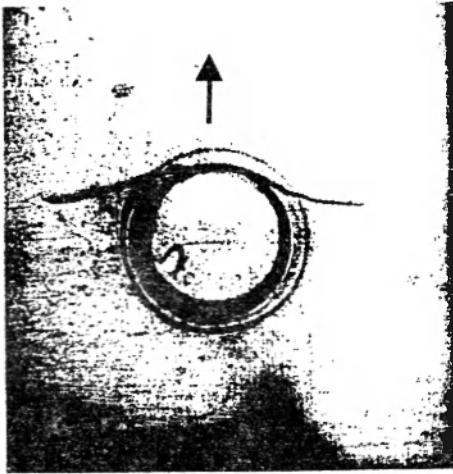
Appearance of the fatigue crack in the plane of the sheet. Arrow shows the direction of tensile loading (Ref. 58)
